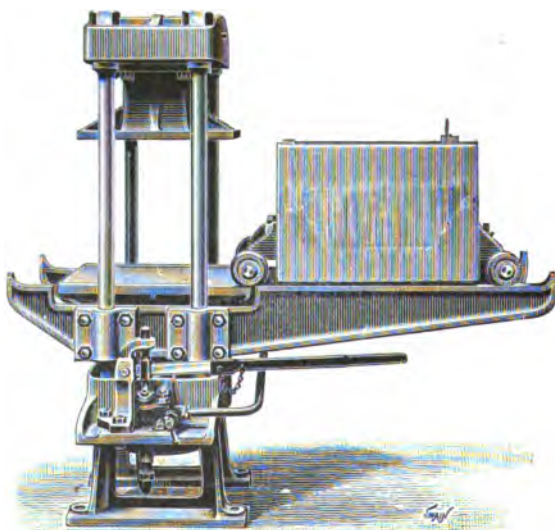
MODERN HYDRAULIC PRESS.¹
